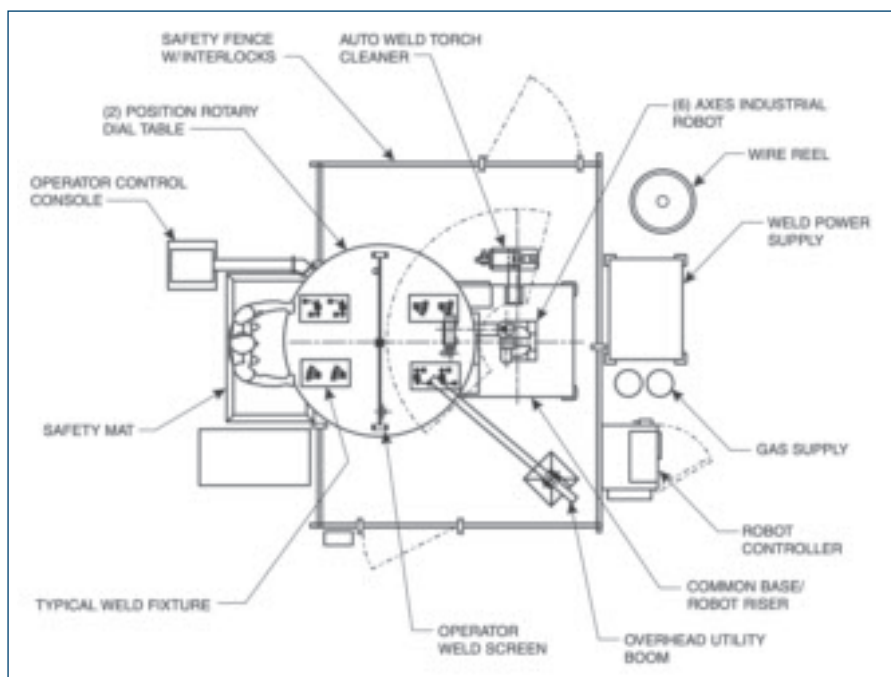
Typical small parts robotic arc welding work cell from AWS D16.3, Risk Assessment Guide for Robotic Arc Welding.
